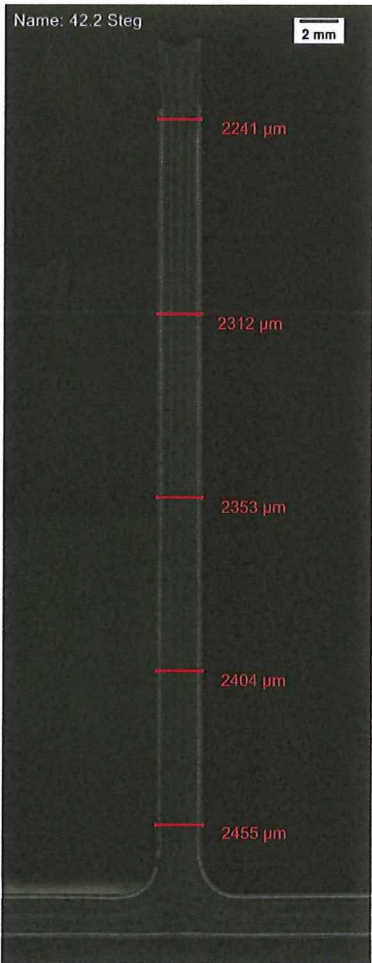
Cross section of panel 13.2 stringer 3 skin
